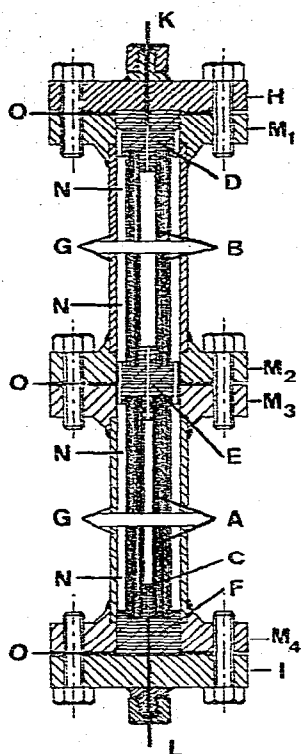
Cross-section of apparatus. A = Chromatographic column; B = reservoir tube; C = PTFE frit; D = inlet plug; E = union; F = outlet plug; G = pressure vessel; H = head flange; I = bottom flange; K = inlet capillary; L = outlet capillary; M_1 - M_4 = end flanges; N = space; O = PTFE gasket.
